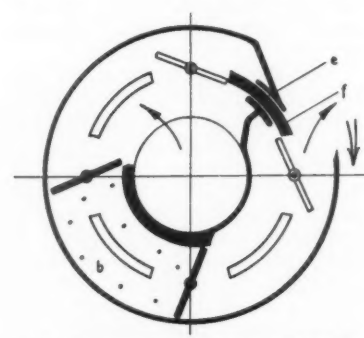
Arrangement having alternate blades replaced by stationary spacing pieces
